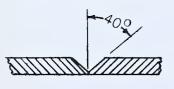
Single-Vee Bevel. See Fig. 369 at 5
